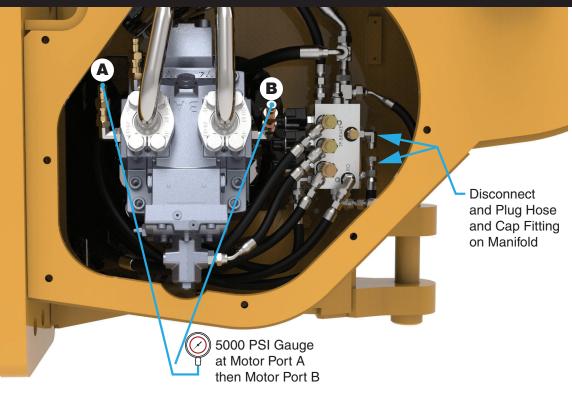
Motor Supply Pressure Check (E465 shown)
